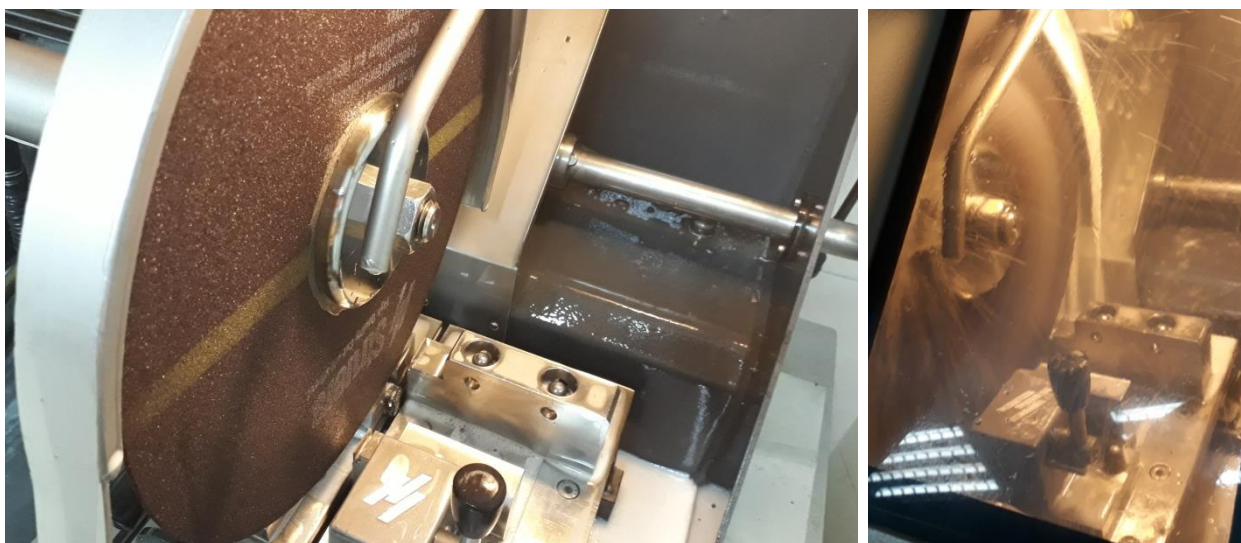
Sample preparation process on cutting machine Unitom-2, Struers (Denmark)
